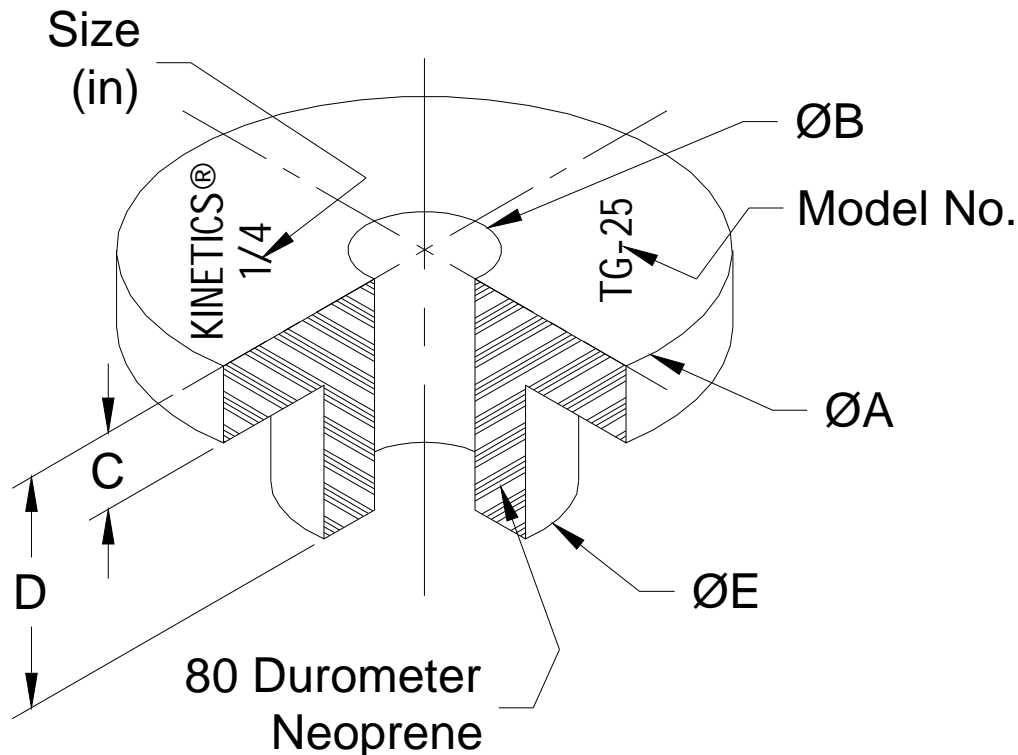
Typical Model TG Bolt Isolation Grommet.
